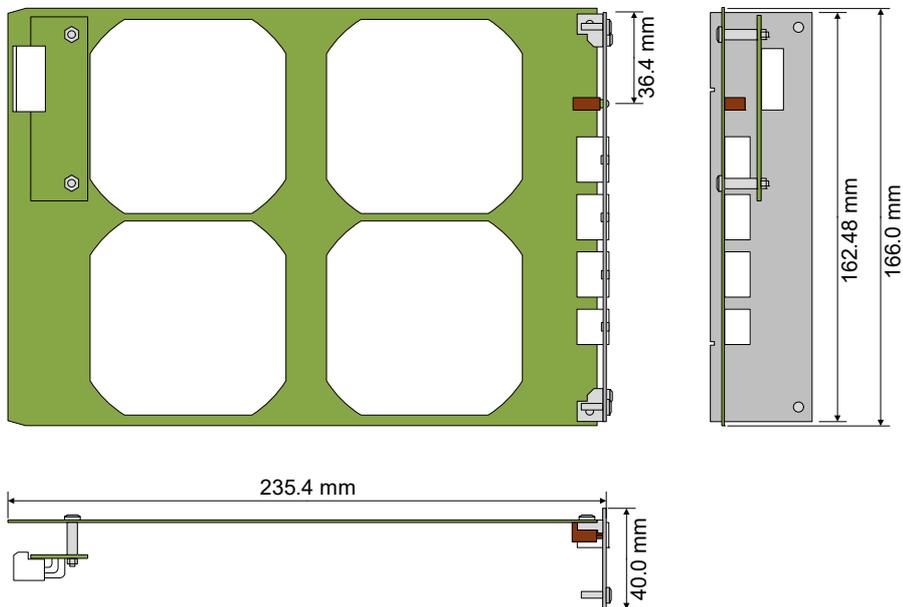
Mechanical dimensions of the FAMO2-F alarm unit
